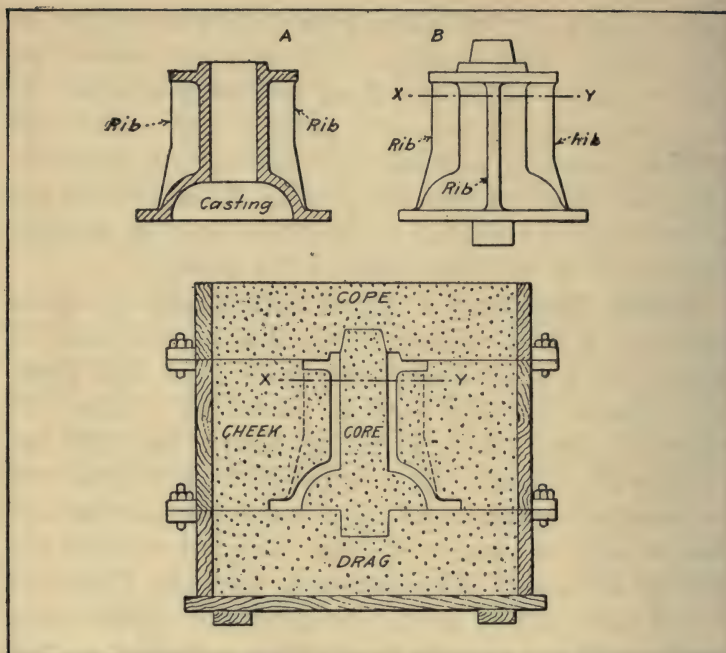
EXAMPLE OF MOLDING A FLANGED AND RIBBED PATTERN IN A THREE-PART FLASK
